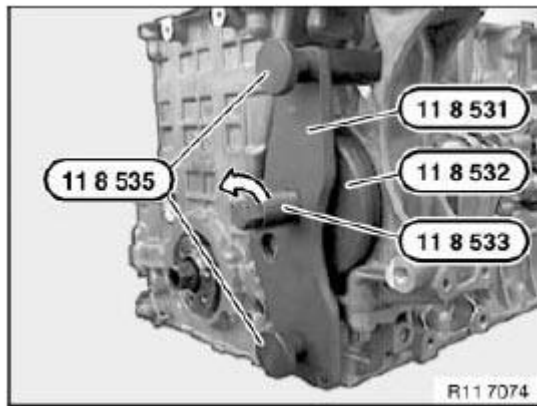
Twisting Out Special Tool (11 8 533) And (11 8 532)
